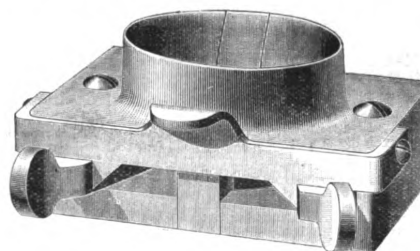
Automatic Elevator Floor-Stop and Lock.
